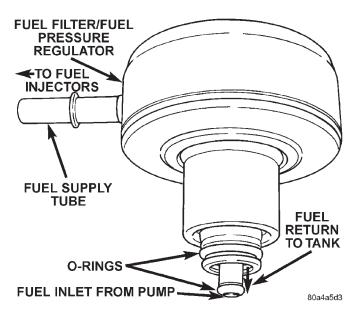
Fuel Filter/Fuel Pressure Regulator O-Rings FUEL PUMP MODULE
